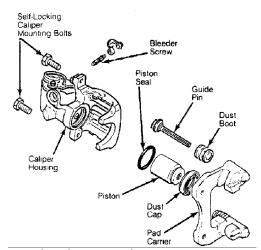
Identifying Caliper Components (Typical) Courtesy of Volkswagen United States, Inc.
